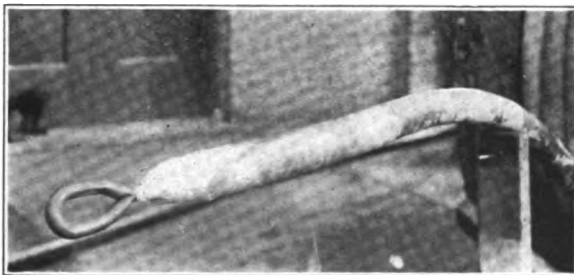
CABLE EYE CONNECTED AND JOINT WIPED
